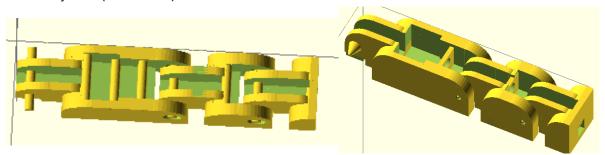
Previous finger iteration (left) with pin-shaped cable guides, round joint pins, and large tolerances, and new finger iteration (right) with redesigned cable guides, conical pins, and lower tolerance.
